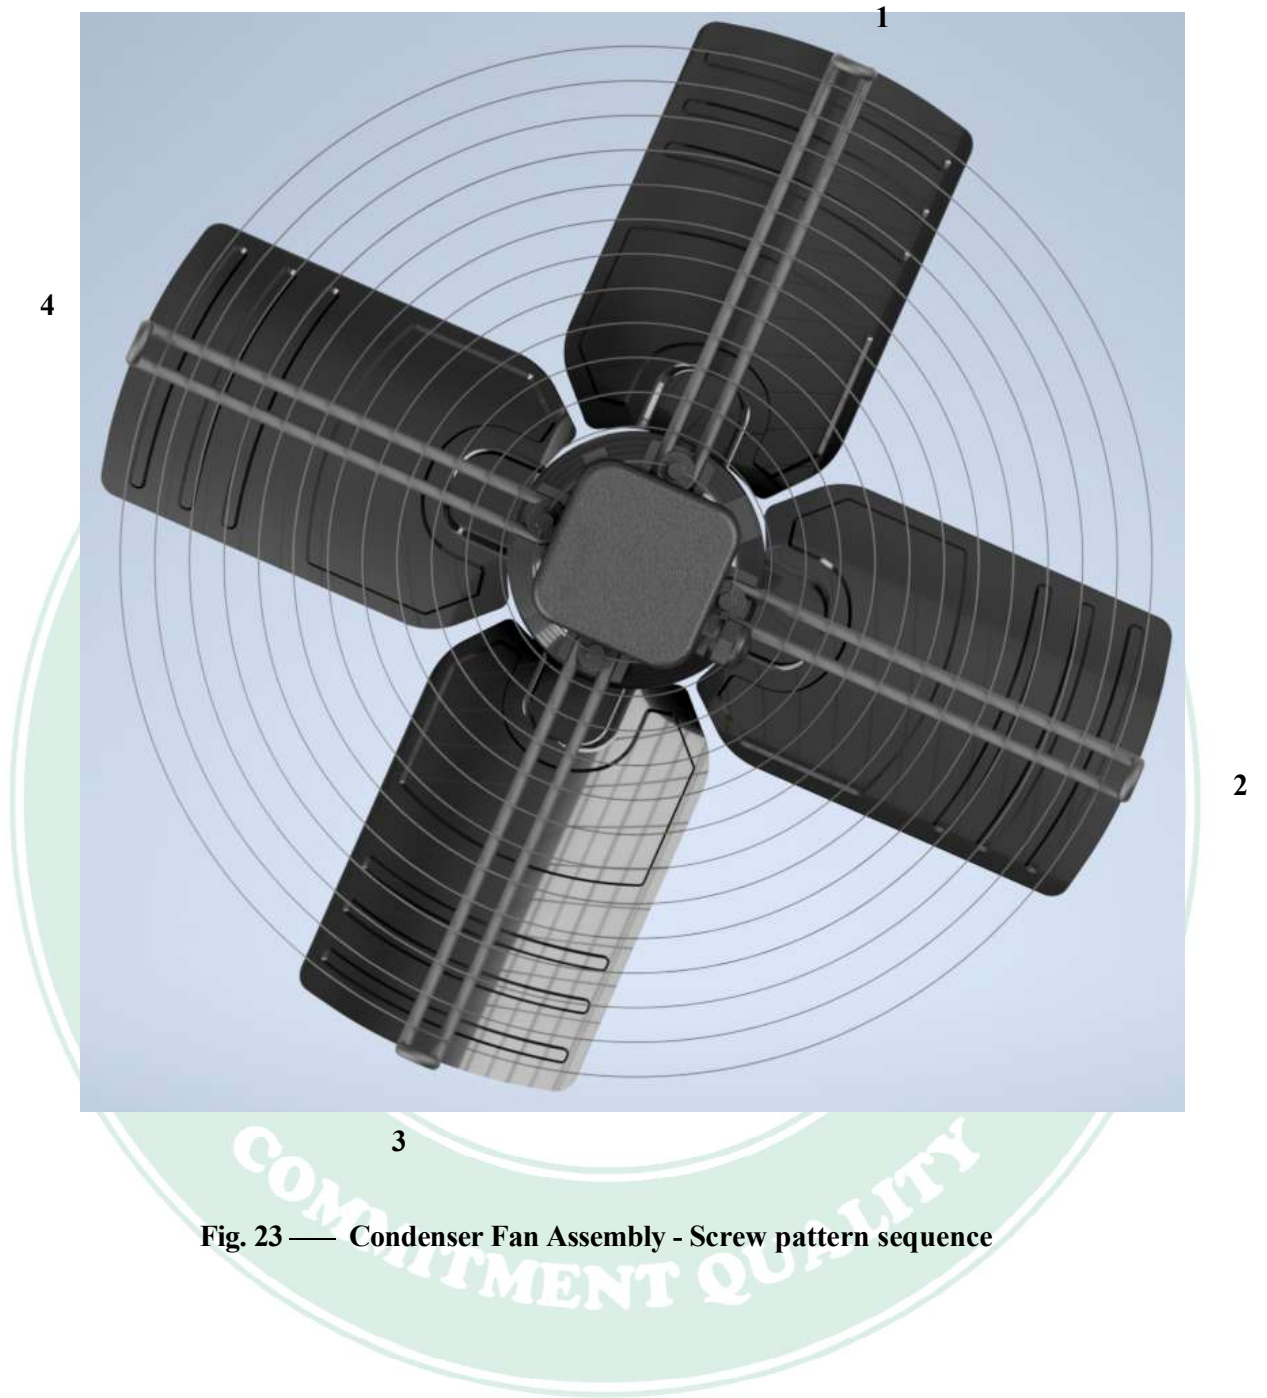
Condenser Fan Assembly - Screw pattern sequence
